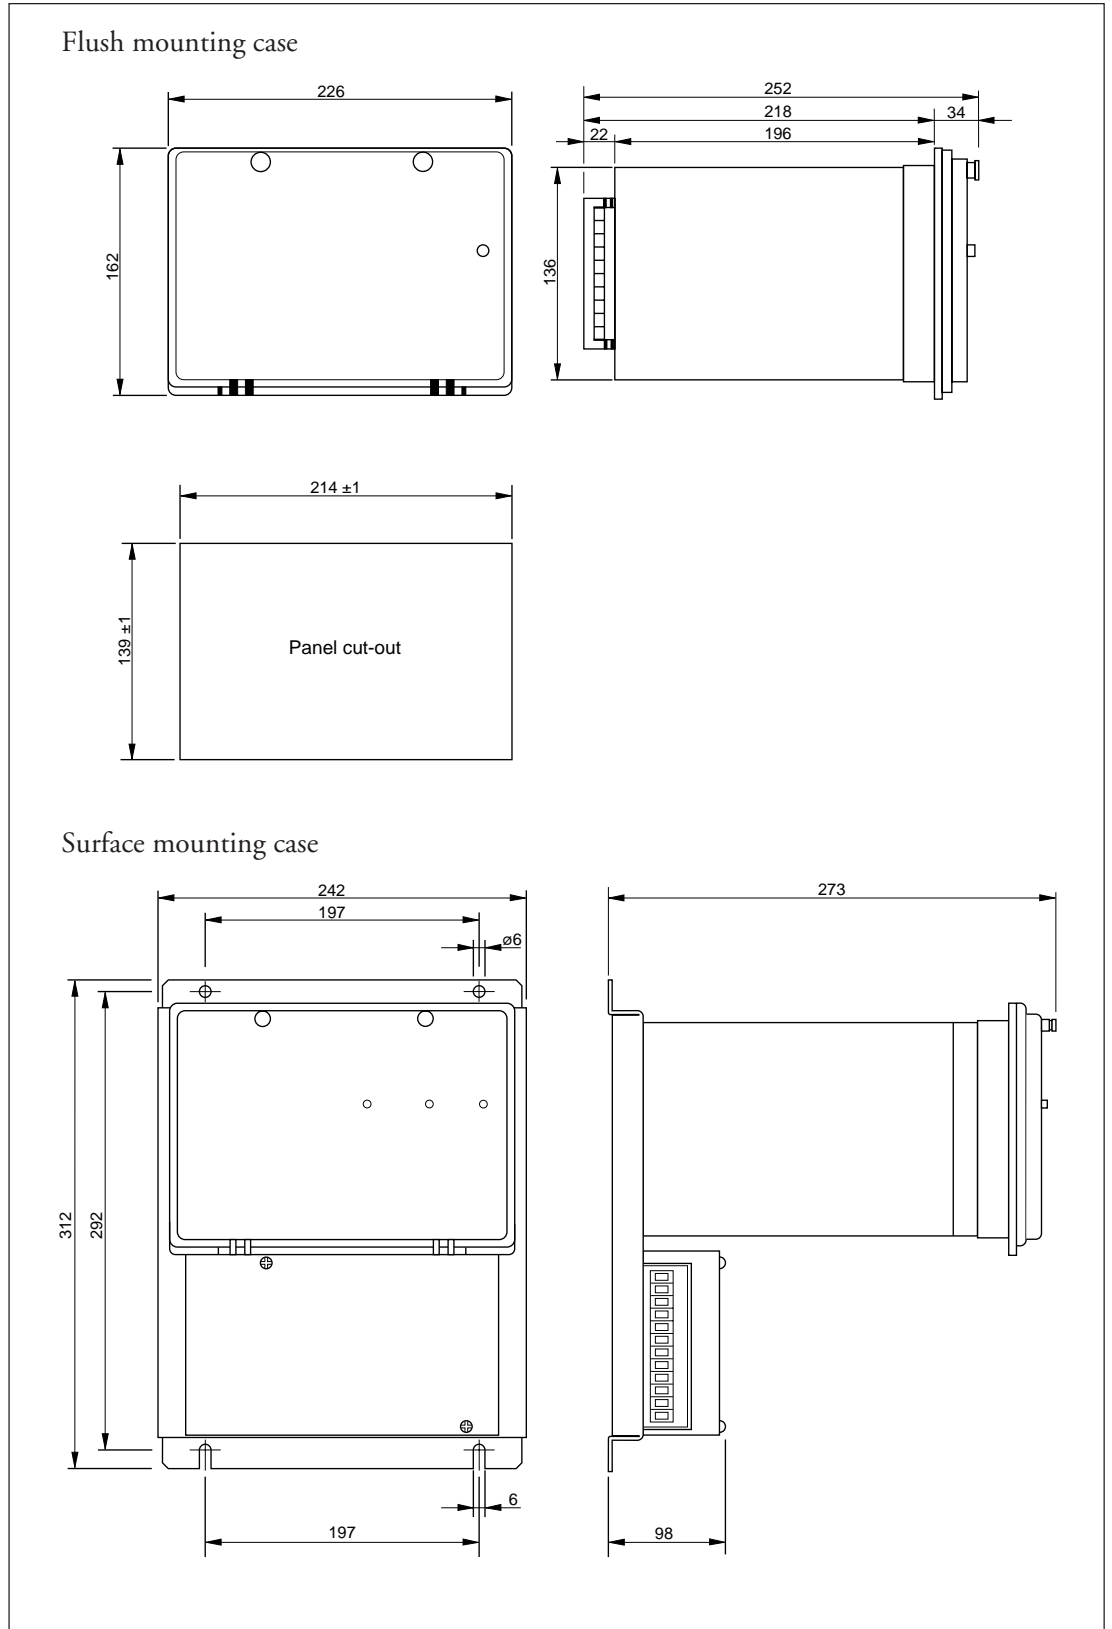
Dimensional drawings for mounting cases of the feeder terminals type SPAC 330 C and type SPAC 331 C.
